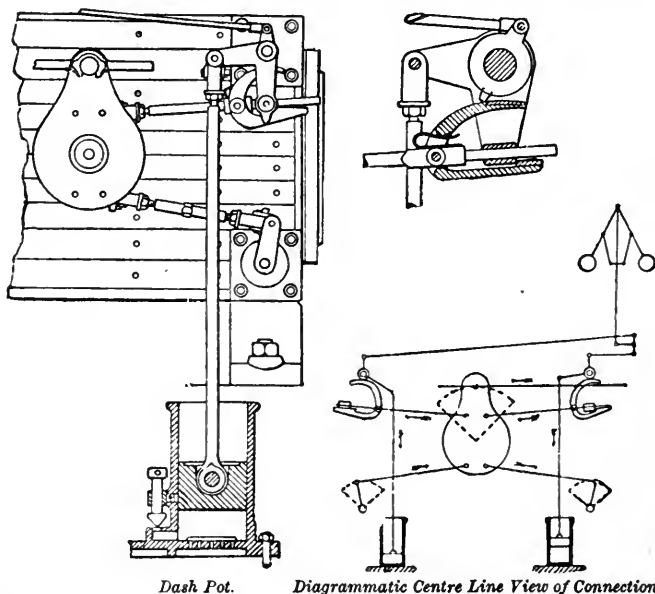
ORDINARY SINGLE ECCENTRIC REYNOLDS-CORLISS VALVE GEAR WITH TRIP MOTION FOR A HORIZONTAL ENGINE.
